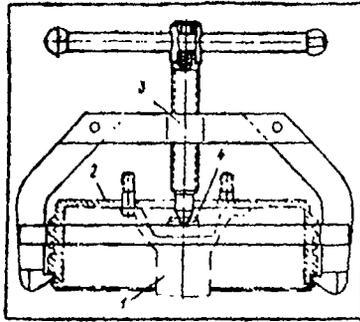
Removal of Brake Drum From Driven Shaft of Transmission: 1, flange; 2, brake drum; 3, puller; 4, driven shaft of transmission
